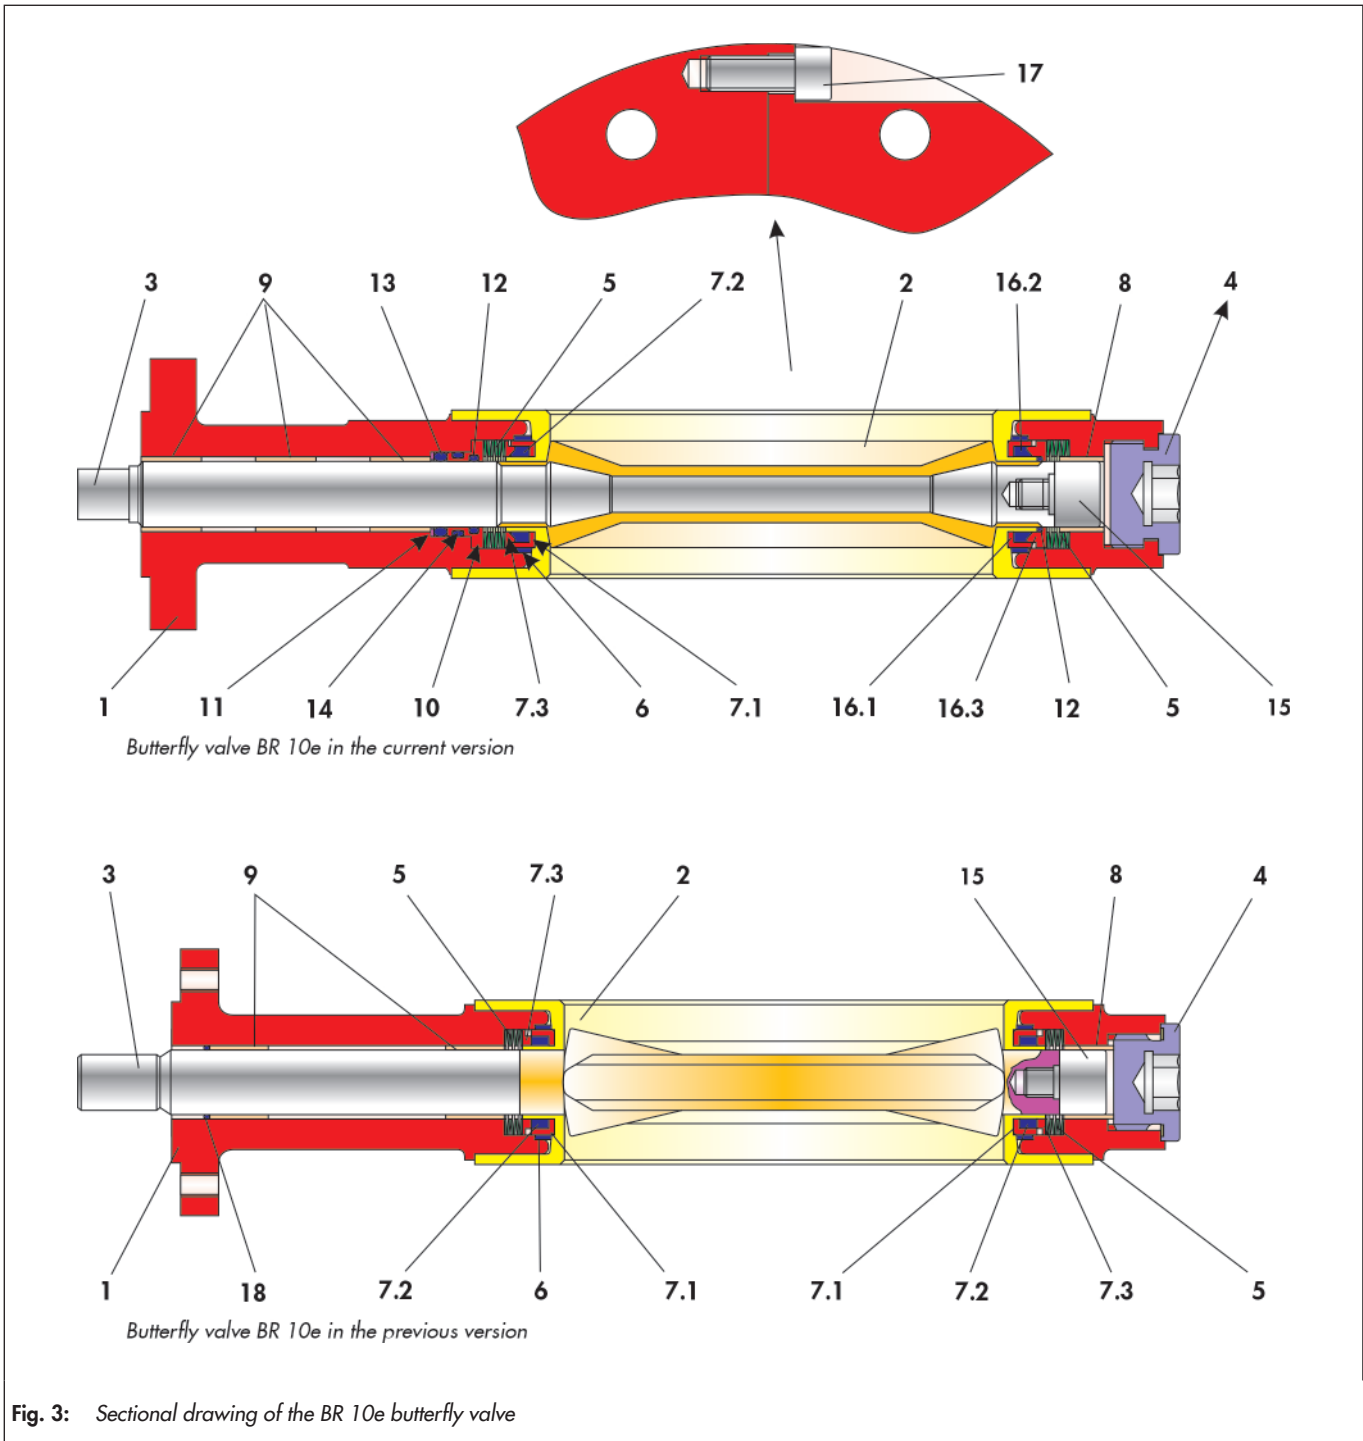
Sectional drawing of the BR 10e butterfly valve
